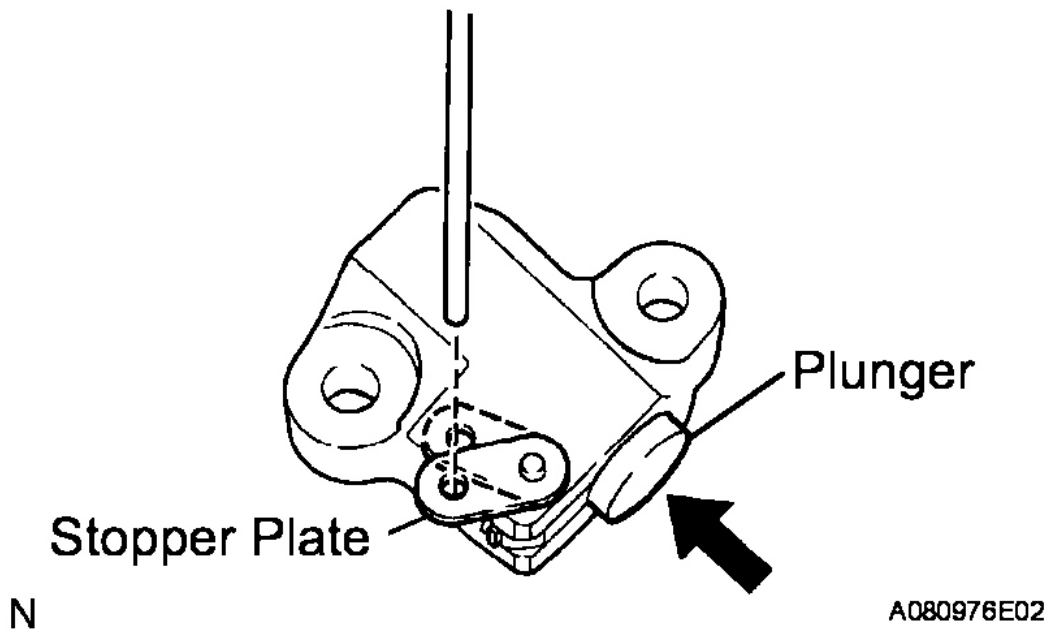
Inserting Bar Into Holes Of Stopper Plate
